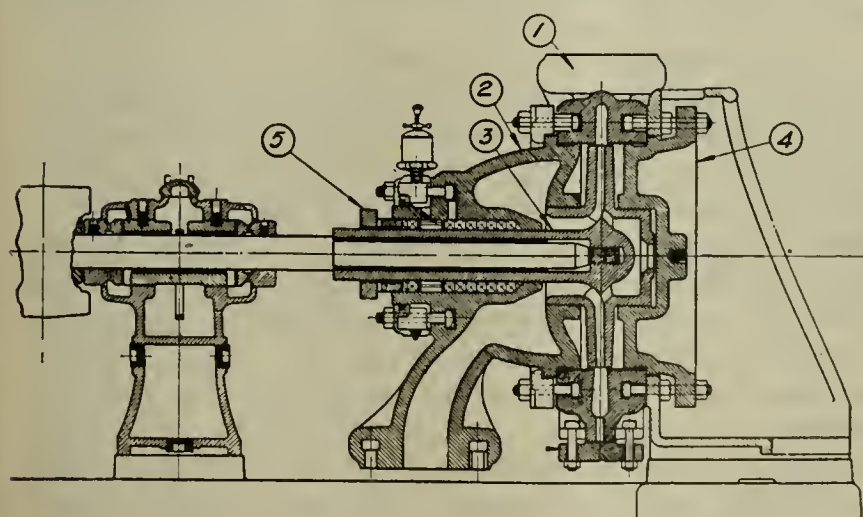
ASSEMBLY DRAWING OF DURIRON CENTRIFUGAL PUMP
